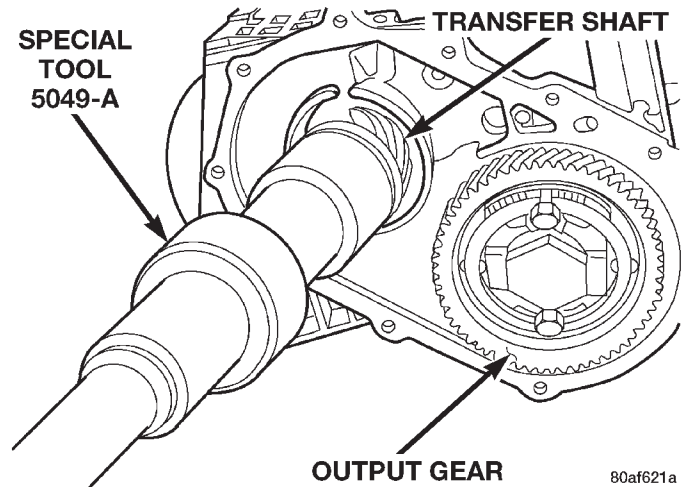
Remove Transfer Shaft Bearing Snap Ring
